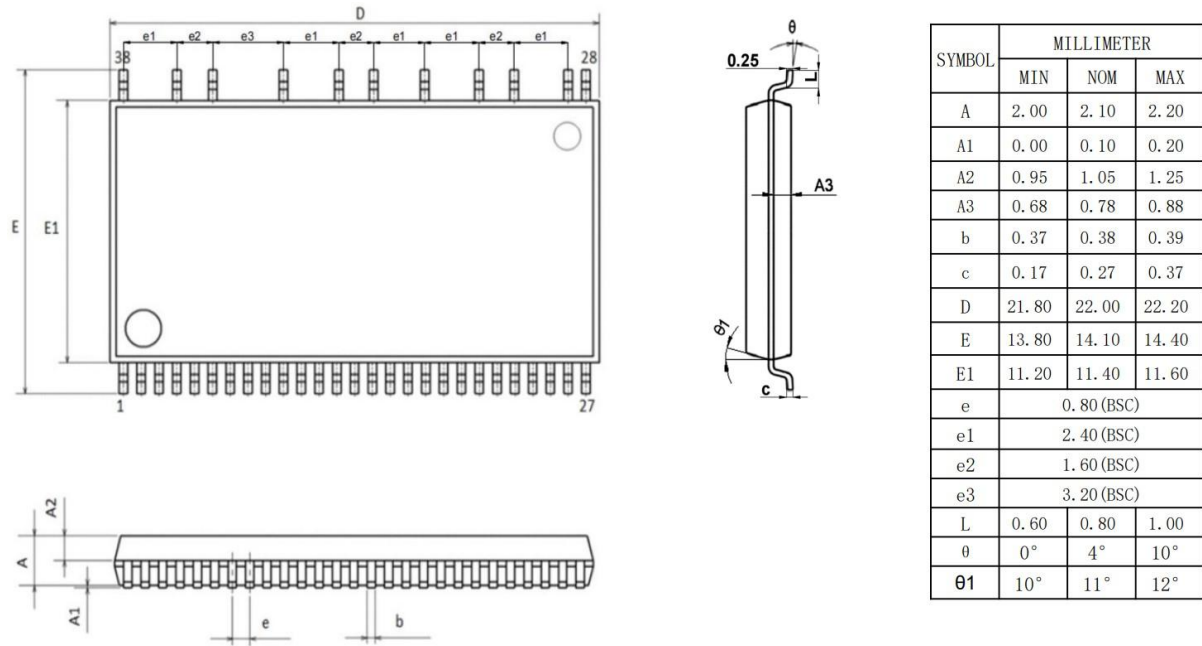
FS92A6AS SSOP A54-38 Package Drawings and Dimensions
